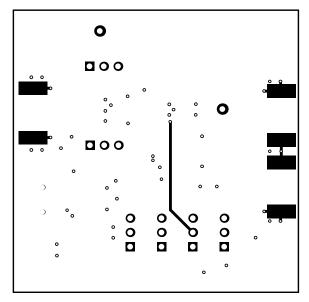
Layer 4 (Bottom Side, View From Bottom)
